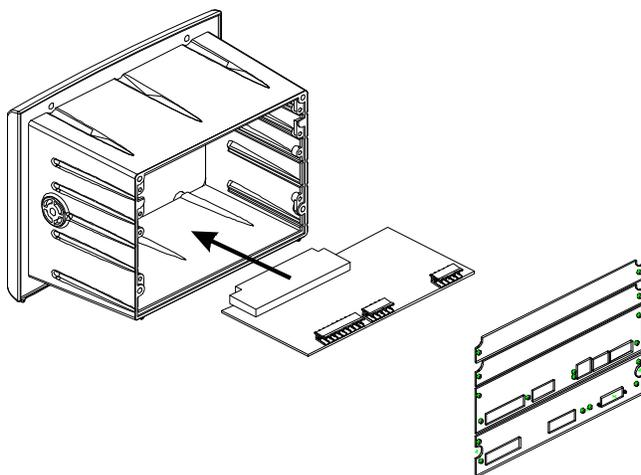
MAIN CONTROLLER BOARD INSTALLATION/LINING UP BOARDS WITH THE SLOTS
